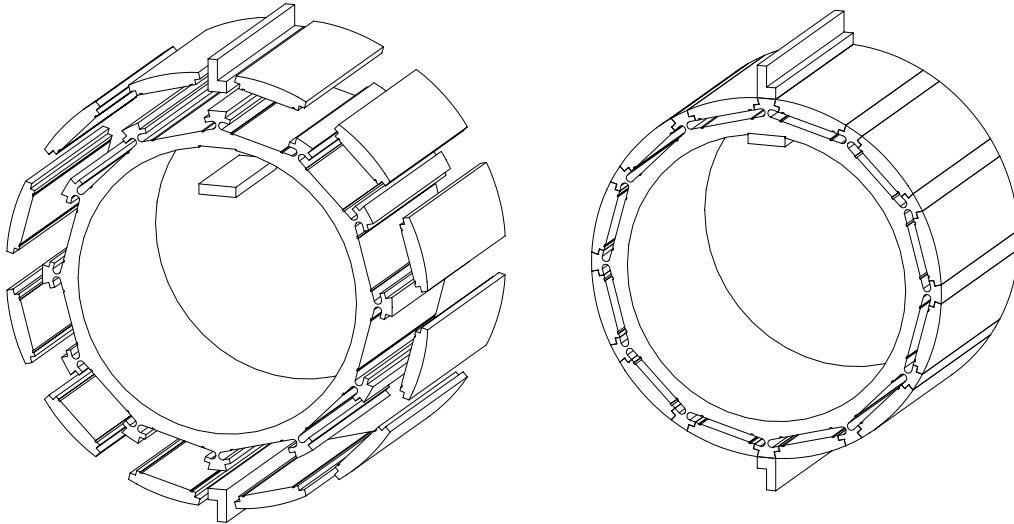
Exploded view showing the construction of the steel of the Strong Support Tube (left) and the assembled part (right).
